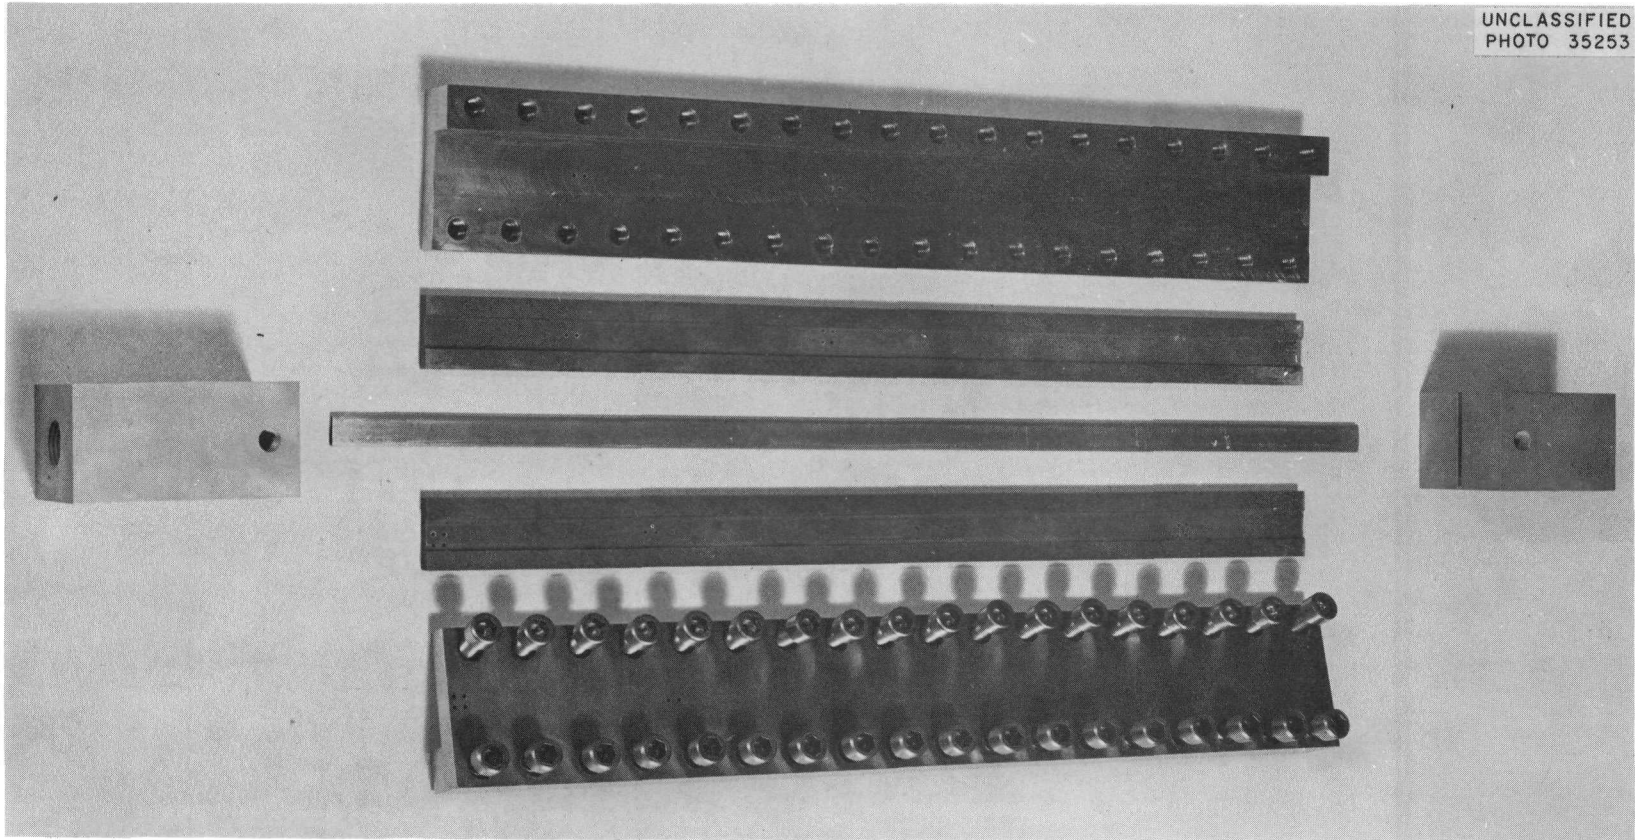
Basic Components of Aluminum Test-Section Assembly. Top to bottom: backup plate, Mycalex insulator, test section and end blocks, Mycalex insulator, and backup plate.
